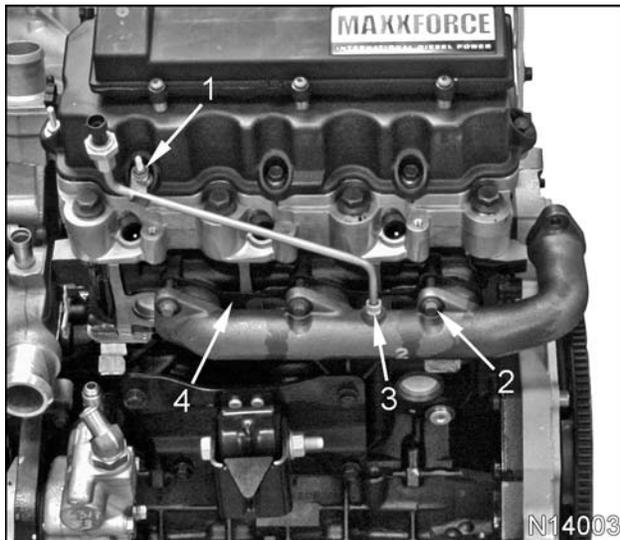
Left exhaust manifold and Exhaust Back Pressure (EBP) tube
